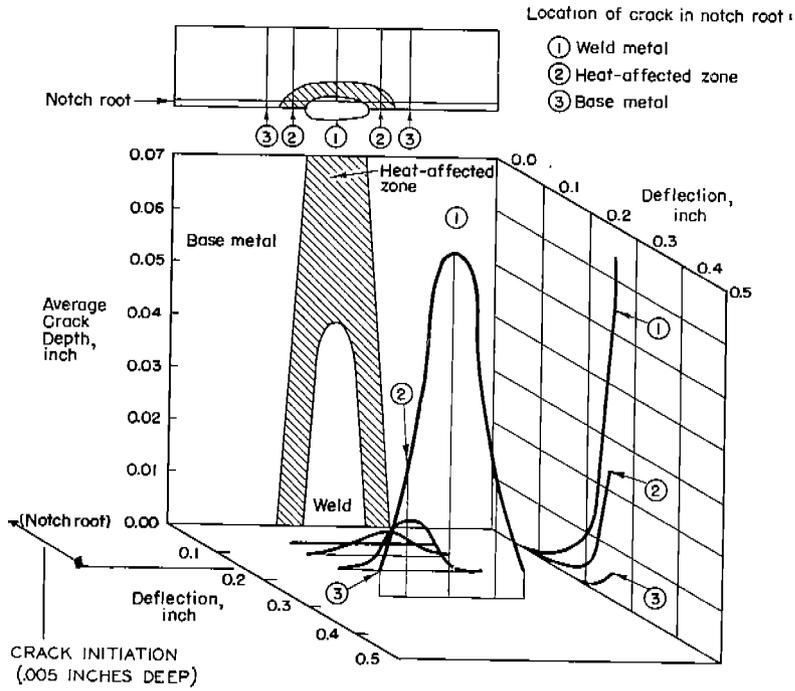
A. CRACK INITIATION AND PROPAGATION IN WELDED "C" STEEL KINZEL-TYPE SPECIMENS TESTED AT 180 F.
